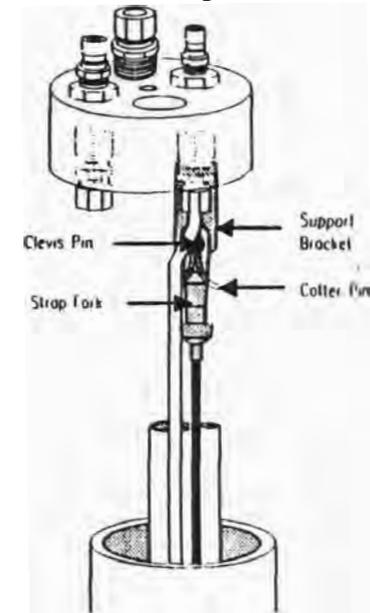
Installing Cable on a 2120A 2-Inch Cap
